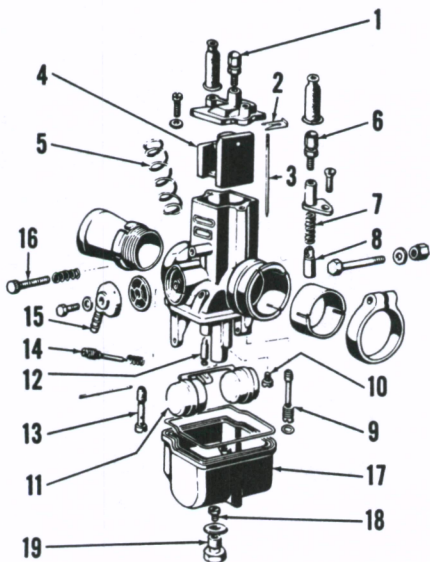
Exploded view of carburetor used on 650cc Tornado.
